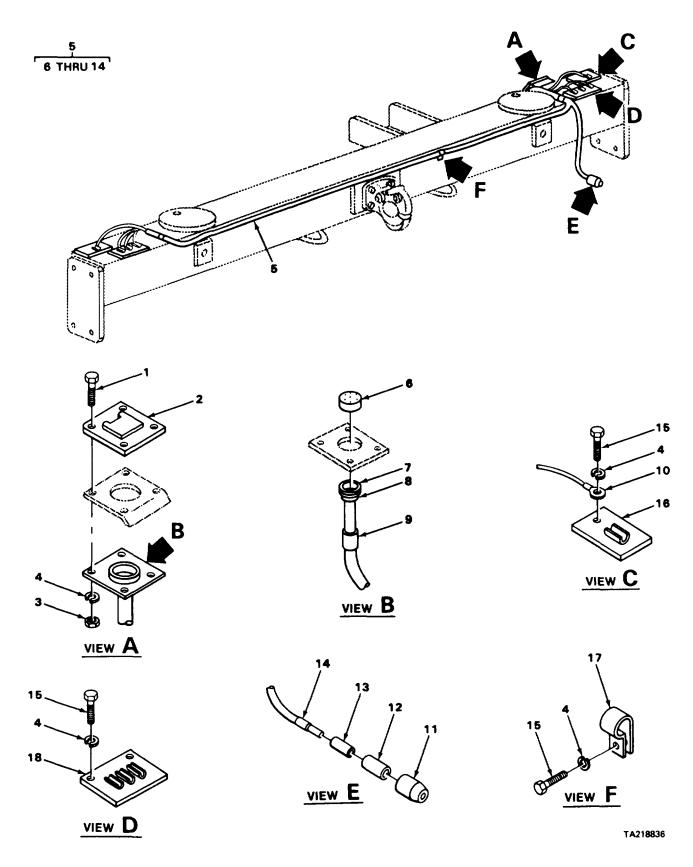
WIRING HARNESS, REAR TRAILER DOLLY (EARLY MODEL).
